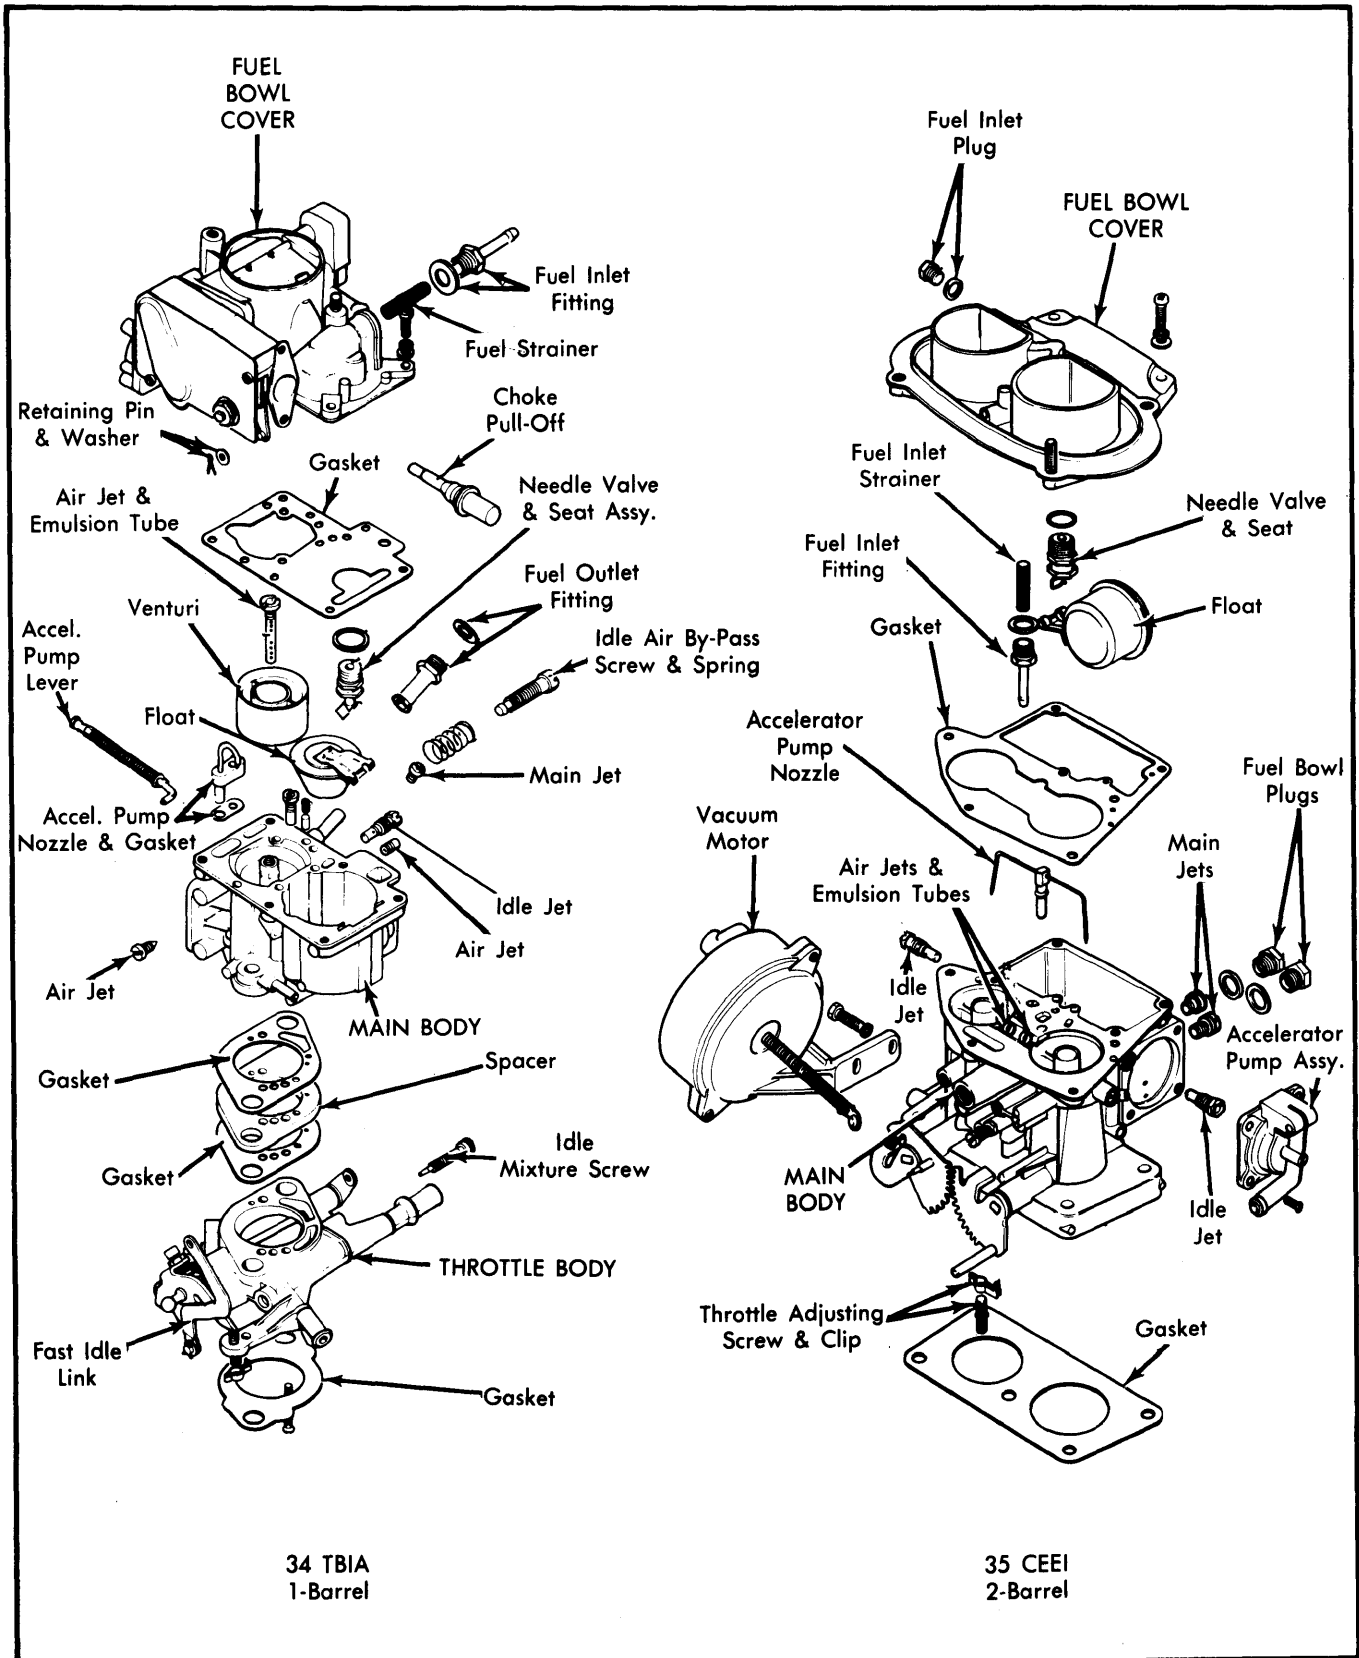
| Exploded View of Solex Models 34 TBIA and 35 CEEI Carburetors
